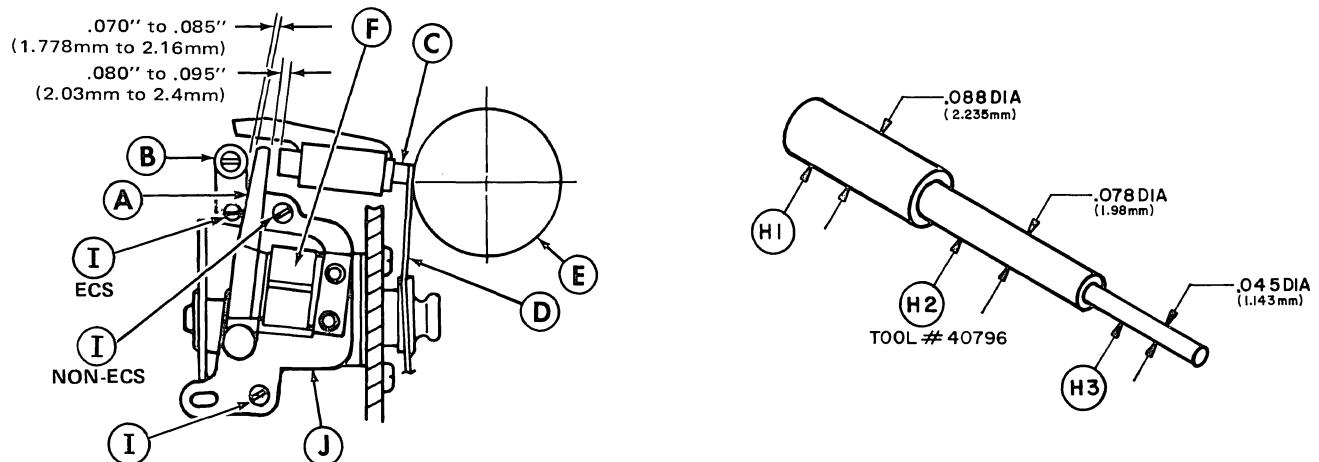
HAMMER ARMATURE ADJUSTMENTS AND ADJUSTMENT TOOL
